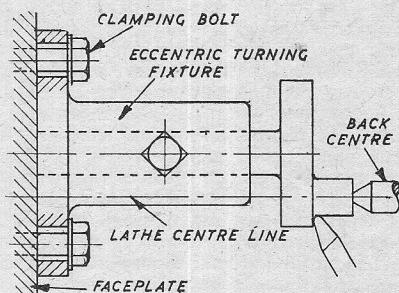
Third operation: main journal held in eccentric turning fixture for machining crankpin
